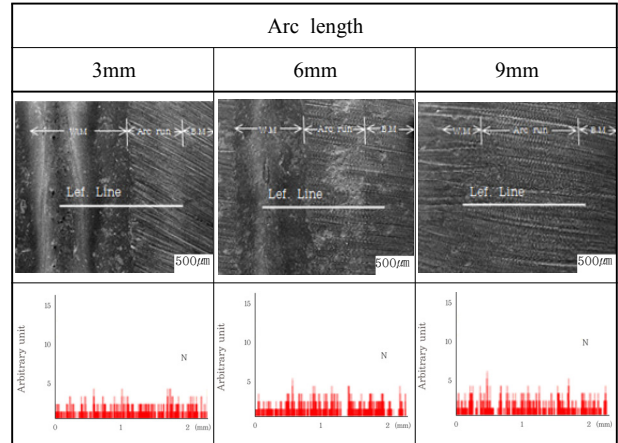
EDX analysis of bead surface(Melt run welding with 100% Ar)
